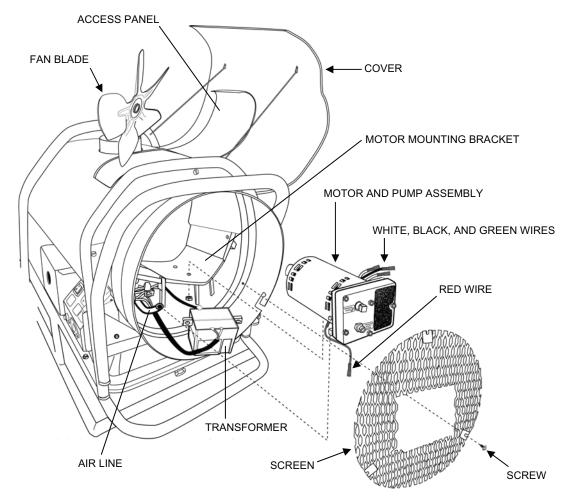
Diesel Heater Motor and Pump Assembly Replacement.
